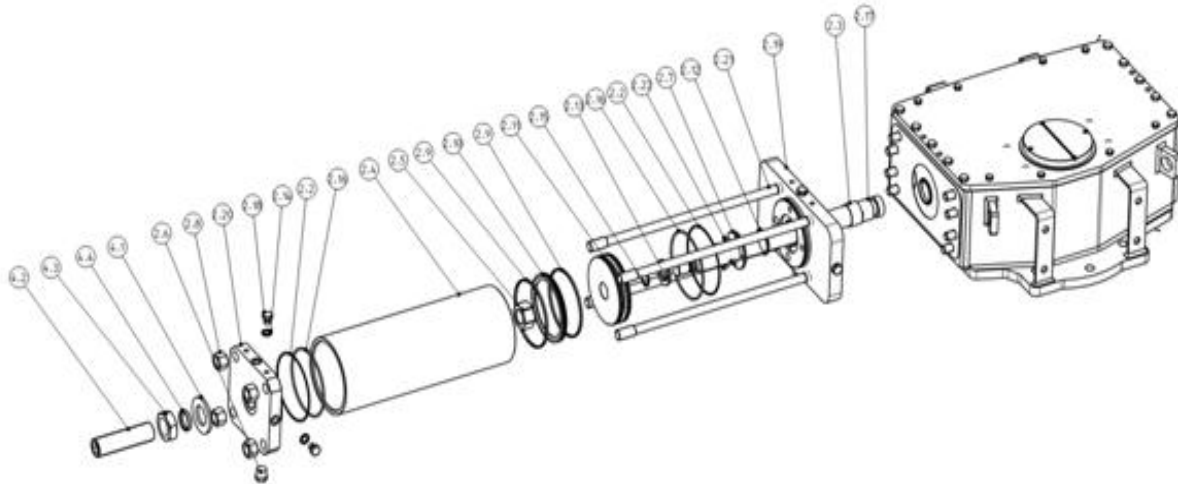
Gas/Hydraulic cylinder seals replacement
